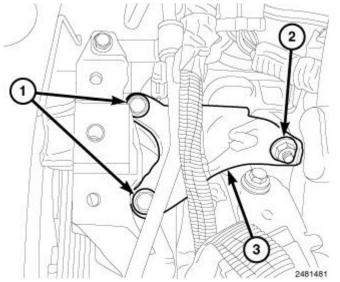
Identifying Bolts, Nut, & Lower Intake Manifold Bracket Courtesy of CHRYSLER LLC
